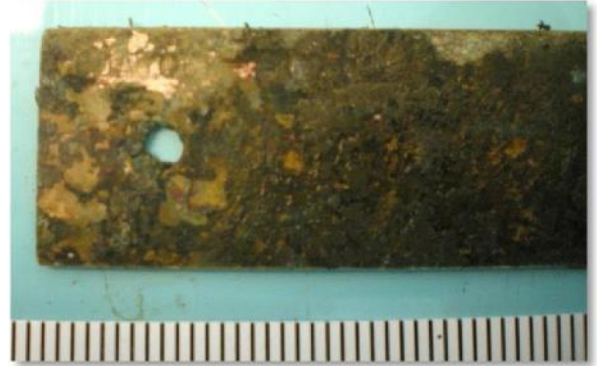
Detail view of 90-10 Cu-Ni 1-inch by 3-inch coupon with weld.
